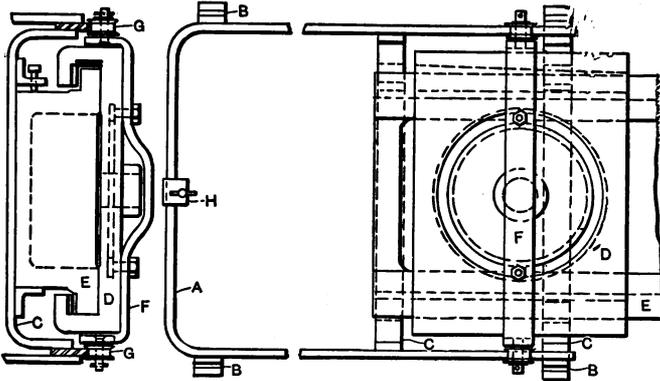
Device used when fitting a Saddle to a Cross-rail
